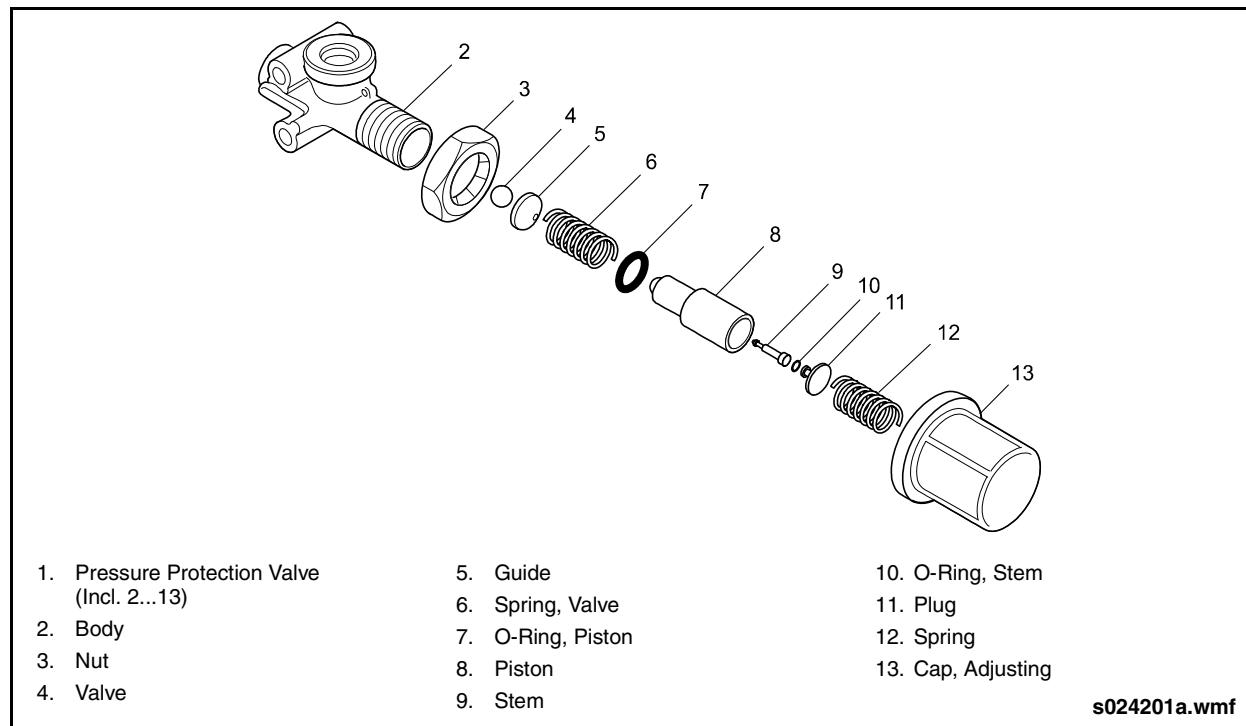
PR-2 Pressure Protection Valve Assembly
